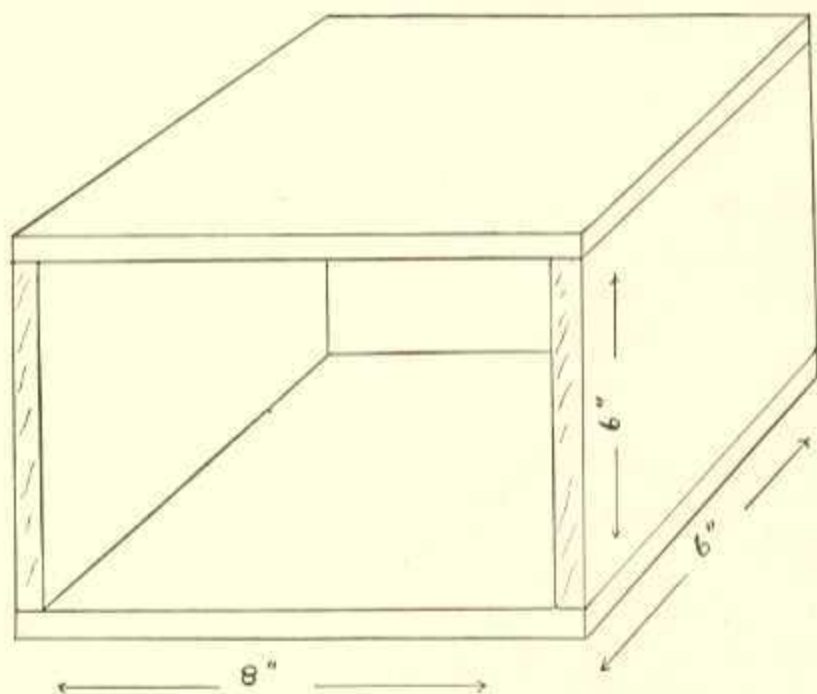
The Completed Cabinet without the Panel or Front Piece.
